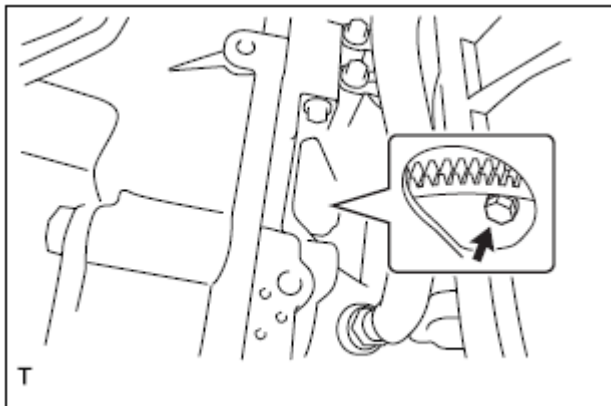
Identifying Drive Plate And Torque Converter Setting Bolts
